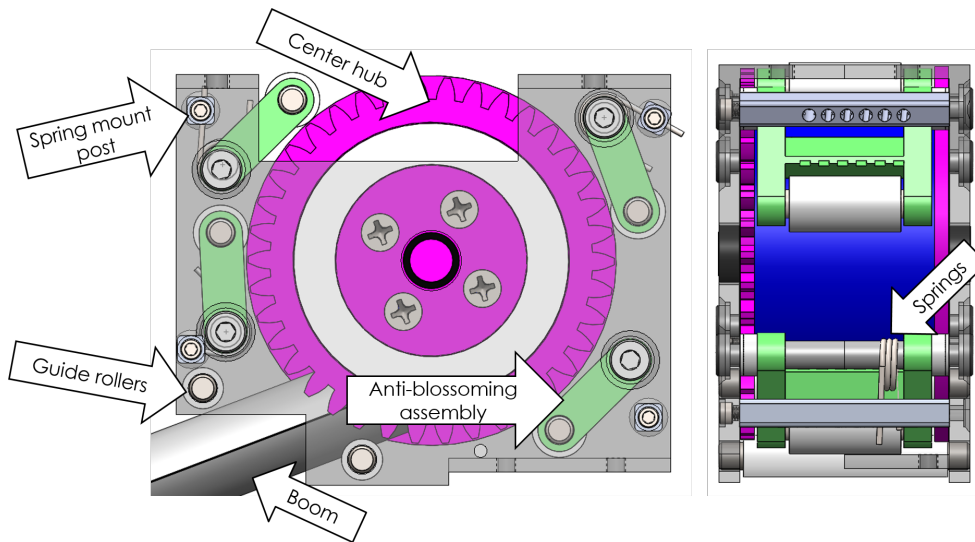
Boom deployer front view with transparent structure (left) and side view (right).
